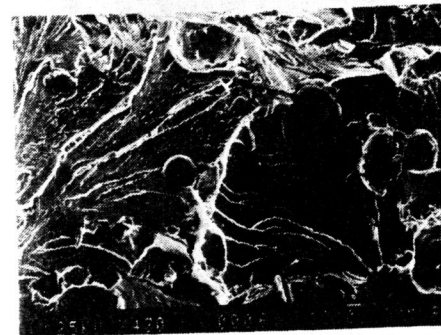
SEM fractograph. Specimens tested below 50°C showed this type of fracture. This one was obtained at -19°C
